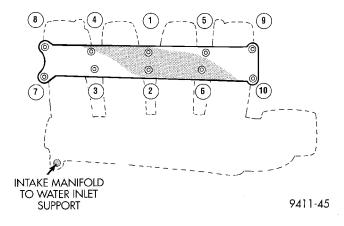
Intake Manifold Tightening Sequence INSTALLATION
